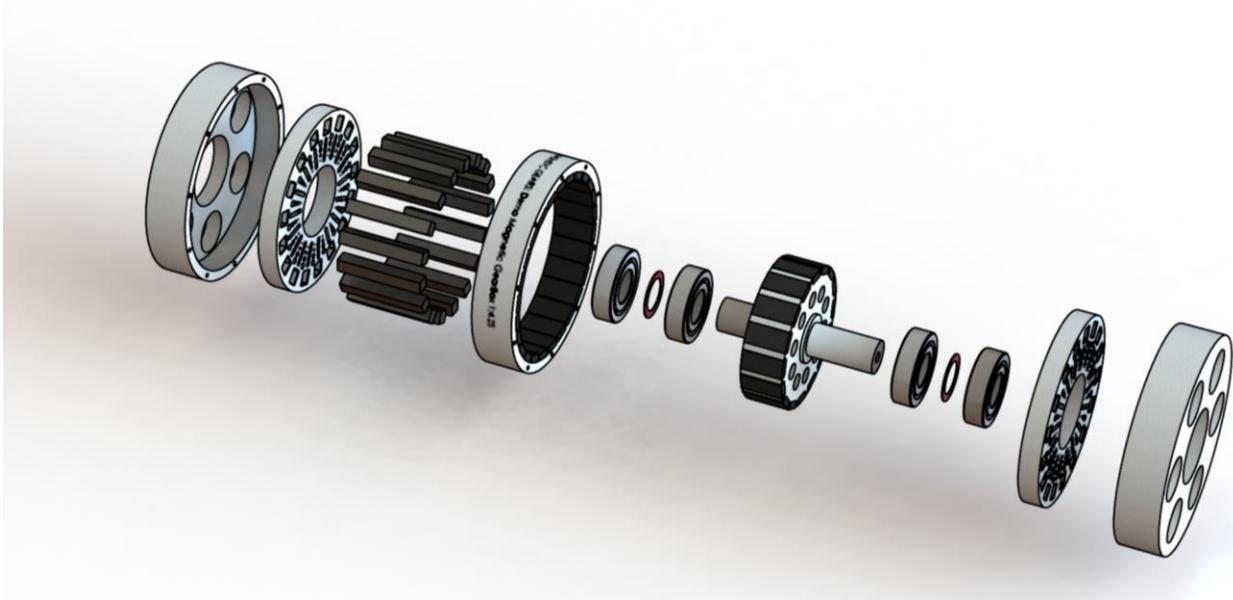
Solidworks exploded assembly view of the radial-flux-focusing magnetic gear.
